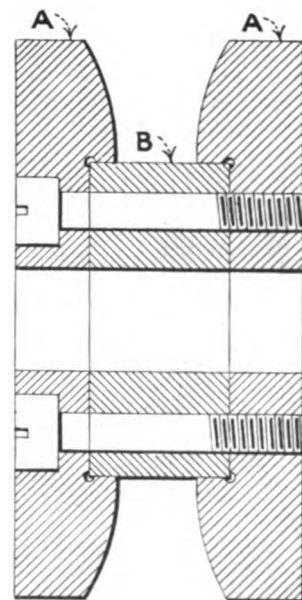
SECTION OF CIRCULAR MASTER TOOL
